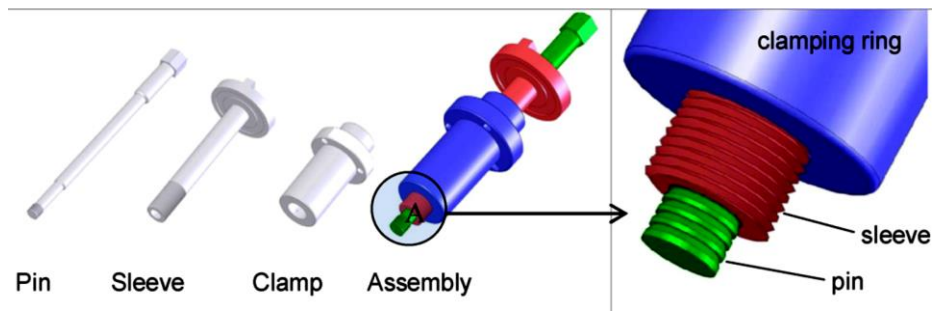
Schematic illustration of the RFSSW tool system showing a detailed view of the three parts: pin, sleeve and clamping ring (Tier, et al., 2013).
